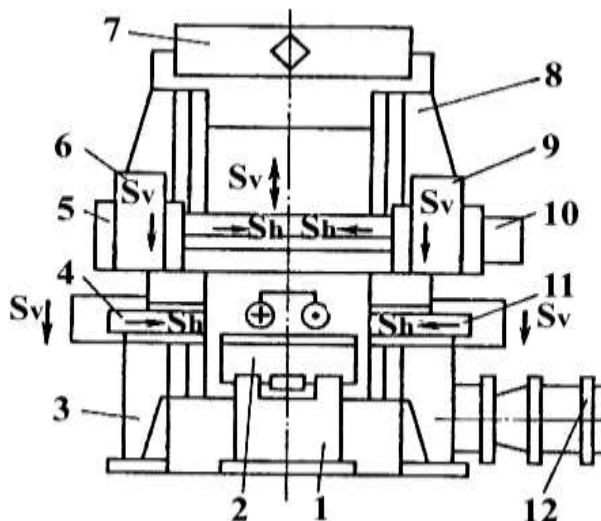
Block diagram of a planer: 1 – body; 2 - table; 3, 8 – columns; 4, 6, 9, 11 - tool-heads; 5, 10 – traverses; 12 – drive
